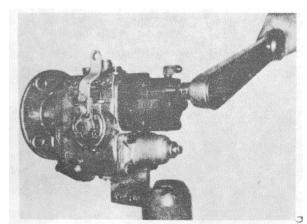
G-66. Torquing Gear Pump Capscrews 3. Install fuel inlet connection with same type threads as gear pump. Current gear pumps use a 3/4 inch-16UNF threaded connection with an O-ring.
